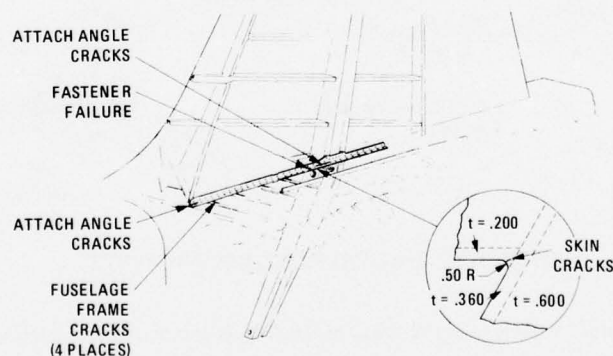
VERTICAL STABILIZER STRUCTURAL ARRANGEMENT
